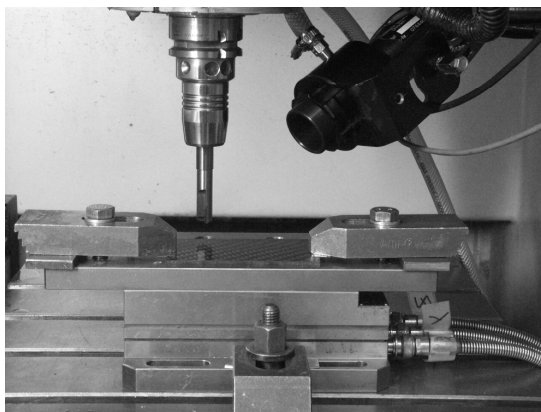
Experimental set-up for groove milling with a PCD end mill
